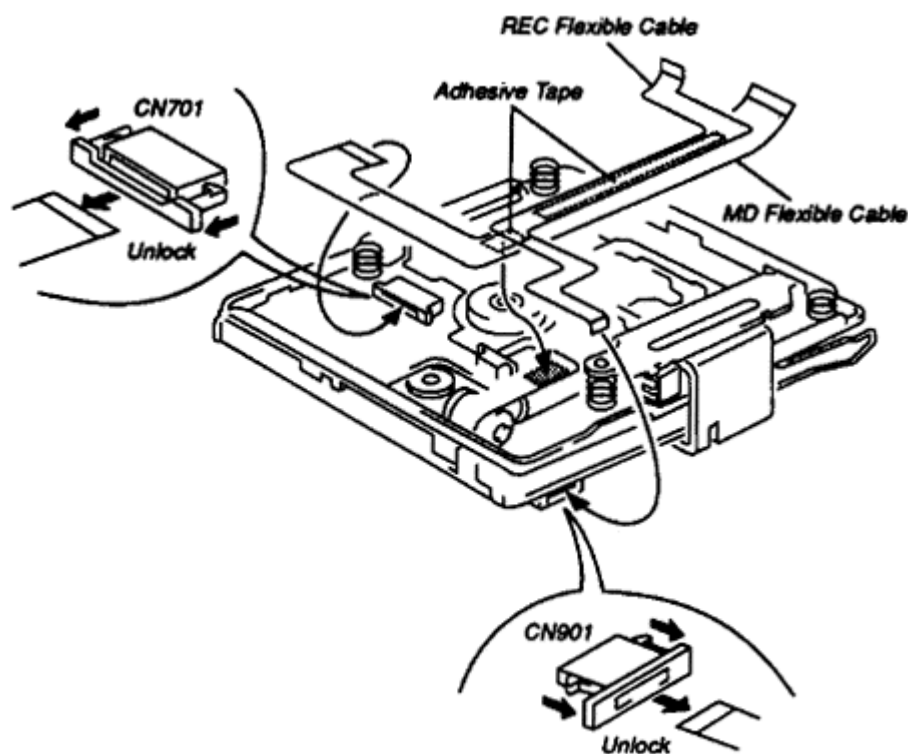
(a) REC/MD Flexible Cable Replacement
